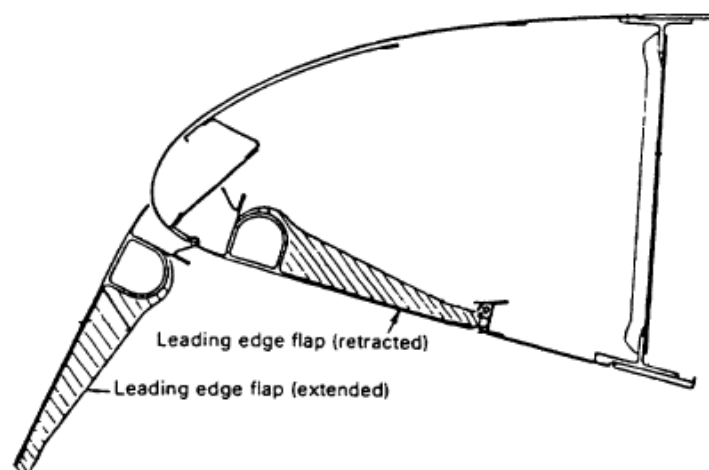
Simple Krueger flap in retracted and deployed position [11].
